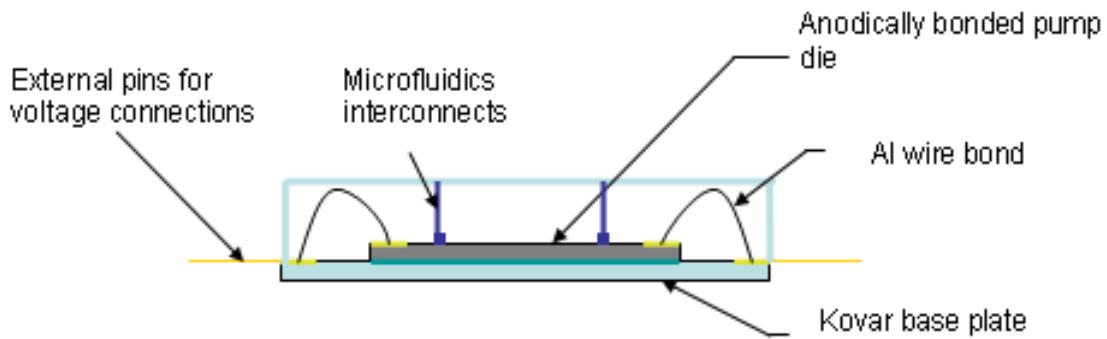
Schematic representation of the packaged pump die (Level 1 packaging) [117].
